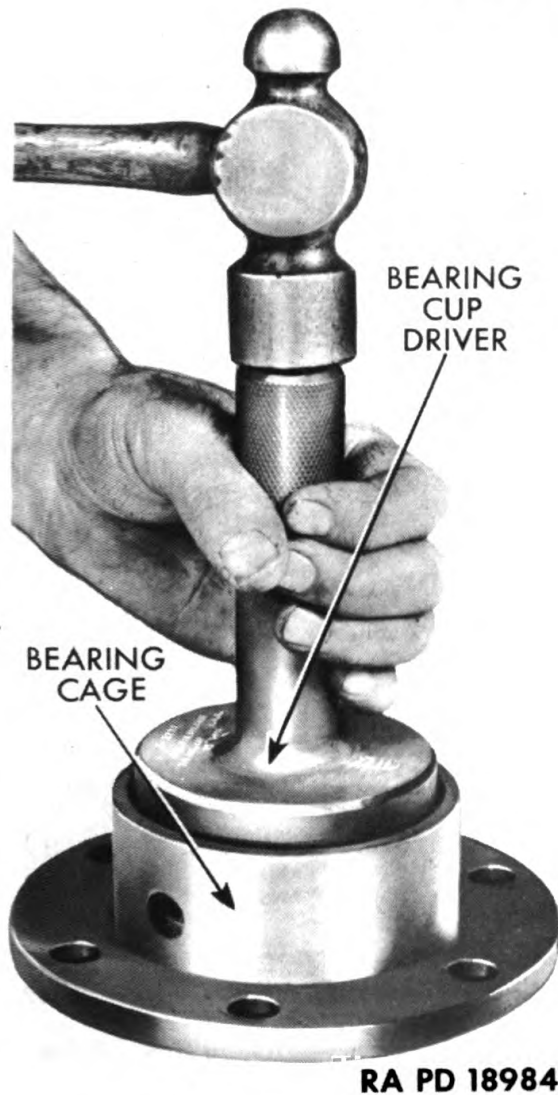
Installing Bevel Drive Pinion Bearing Cup
